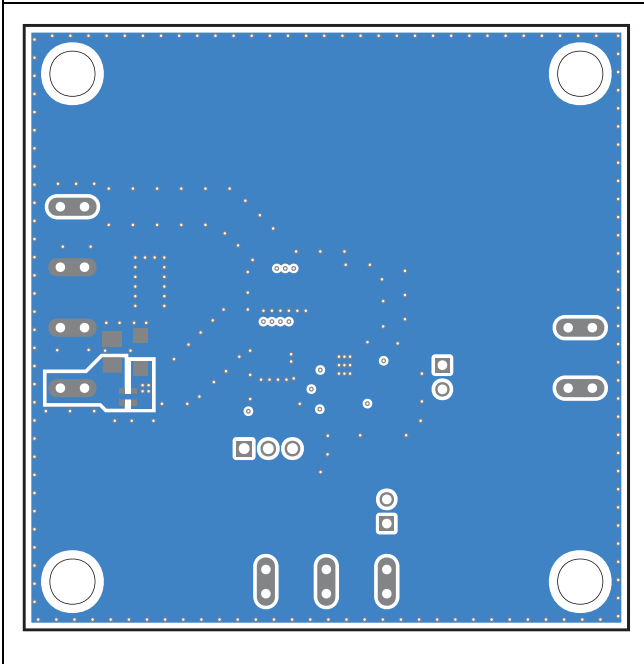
MAX17760AAEVKIT# PCB Layout—Bottom View
